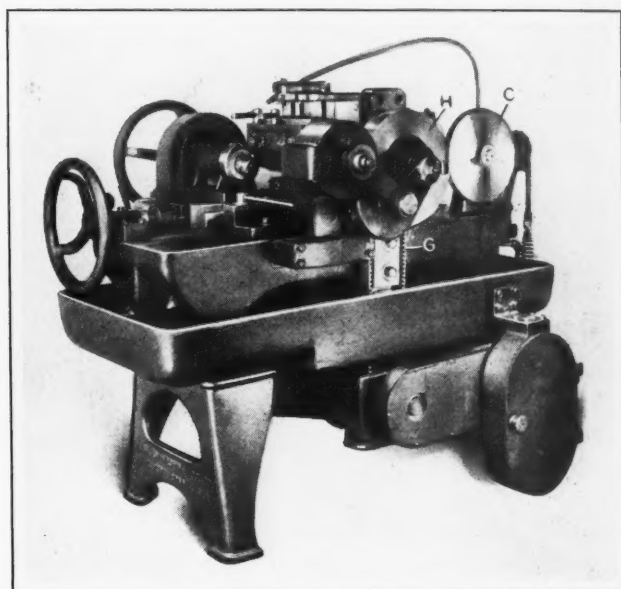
Bilton "Producto-Matic" Arranged for Milling Cams
